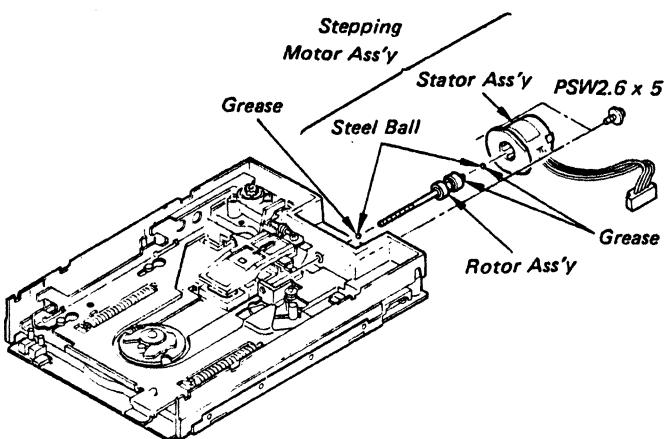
Stepping Motor Ass'y (Stator Ass'y and Rotor Ass'y) Replacement
